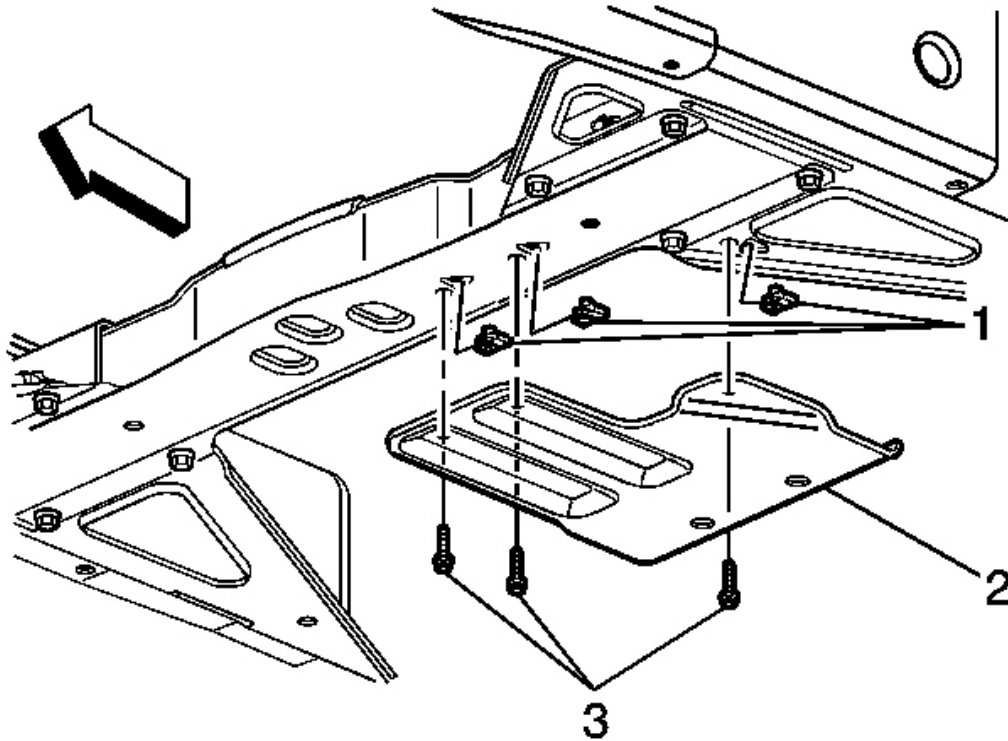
Identifying Transfer Case Shield & Mounting Bolts
